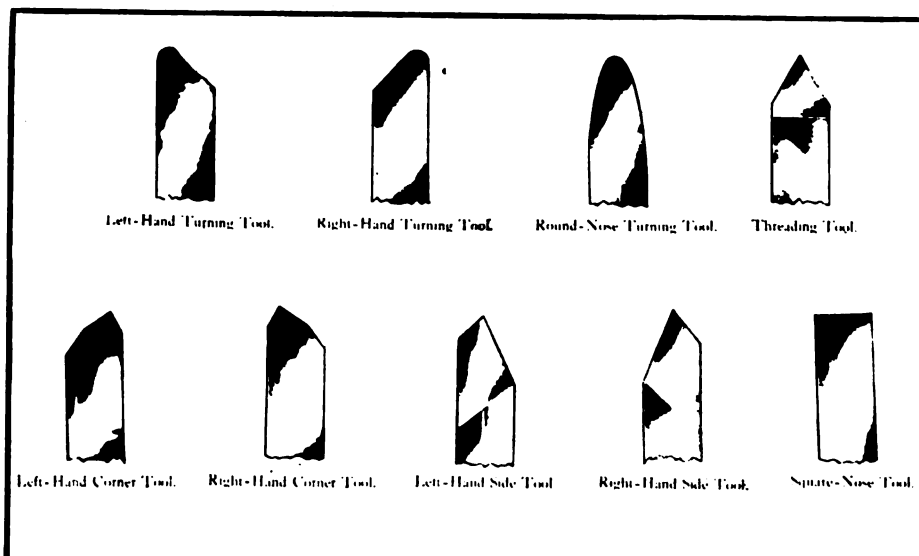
Standard Shapes Used In Grinding Lathe Tools.
